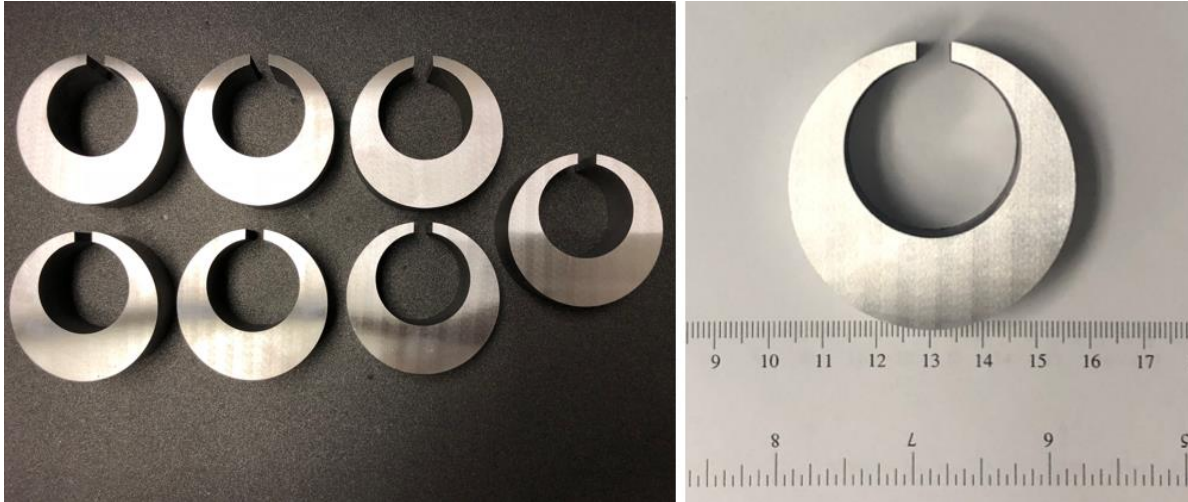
Fabricated specimens made by AISI 4140 steel using CNC lathe.
